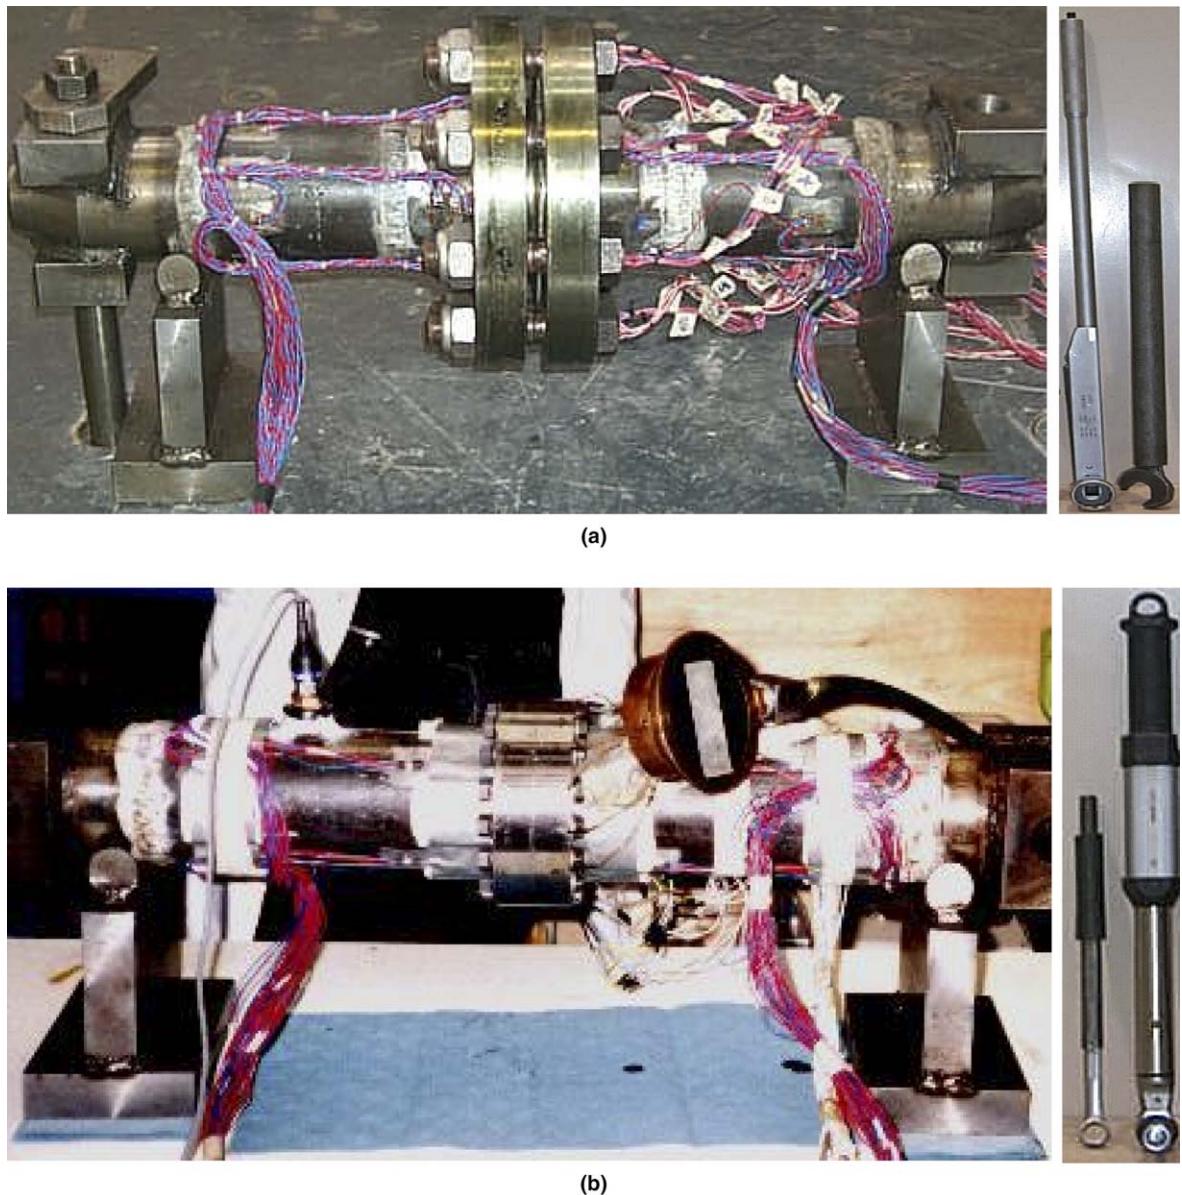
Flange joint assembly with tools: (a) gasketed and (b) non-gasketed.
